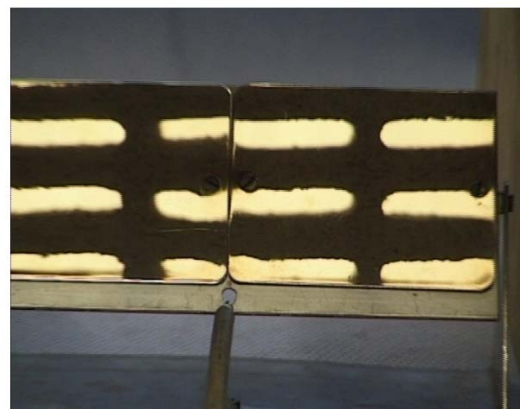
Application of Prototype 1 inspection system with incidence of daylight through a cold test checker brick
